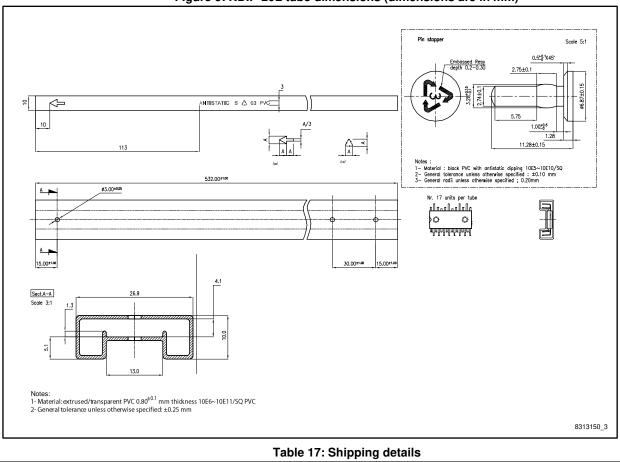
NDIP-26L tube dimensions (dimensions are in mm)
